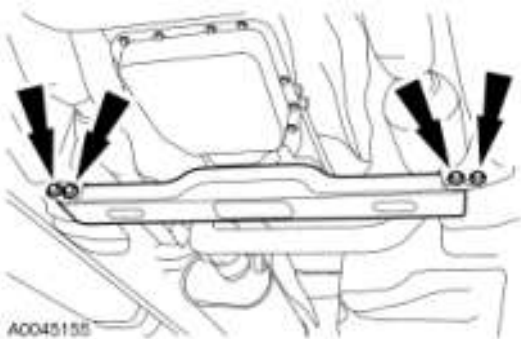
Removing Rear Transmission Retainer Nuts & Crossmember
